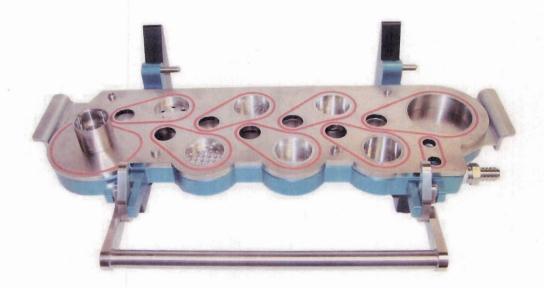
Seal Body and Cup Tray Resting on Bottom Frame
